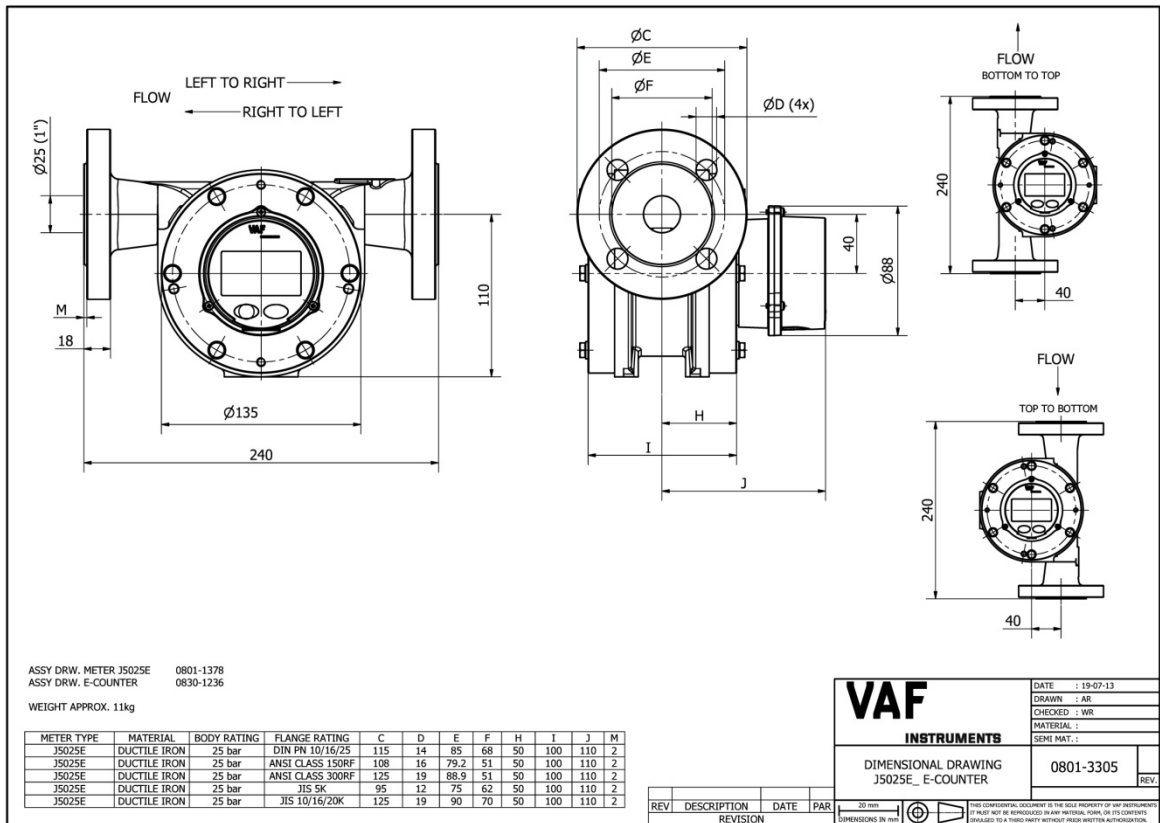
Drawing 0801-3305 – Dimensional drawing J5025E E-counter
